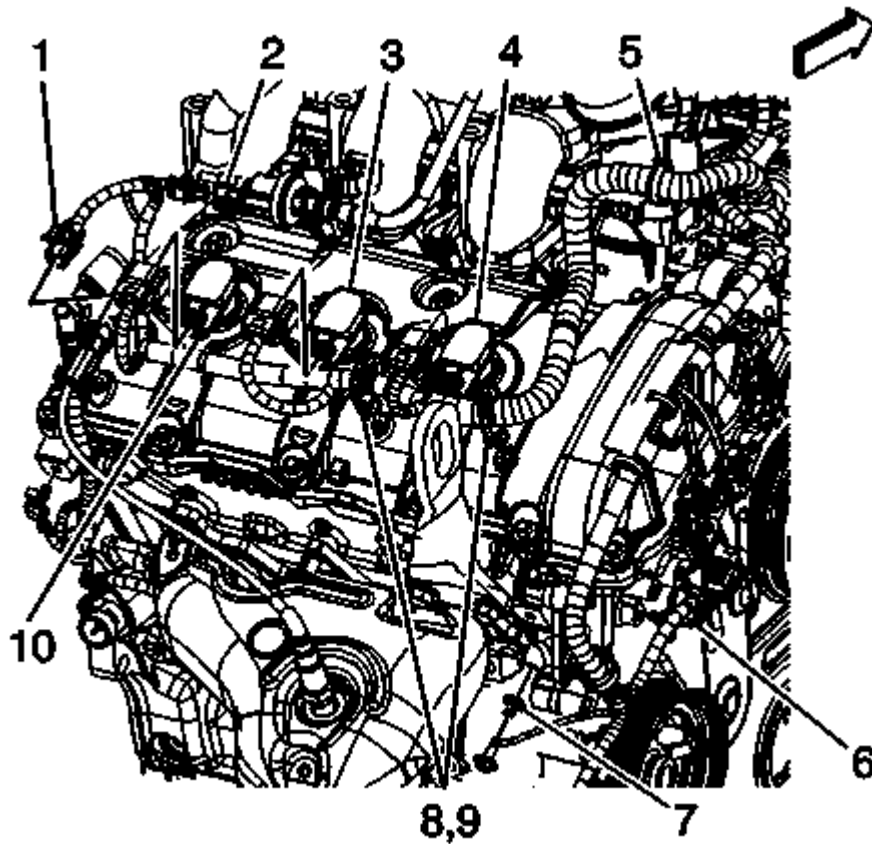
Identifying Oxygen Sensor, EVAP Purge Solenoid, Ignition Coils & Retainers
